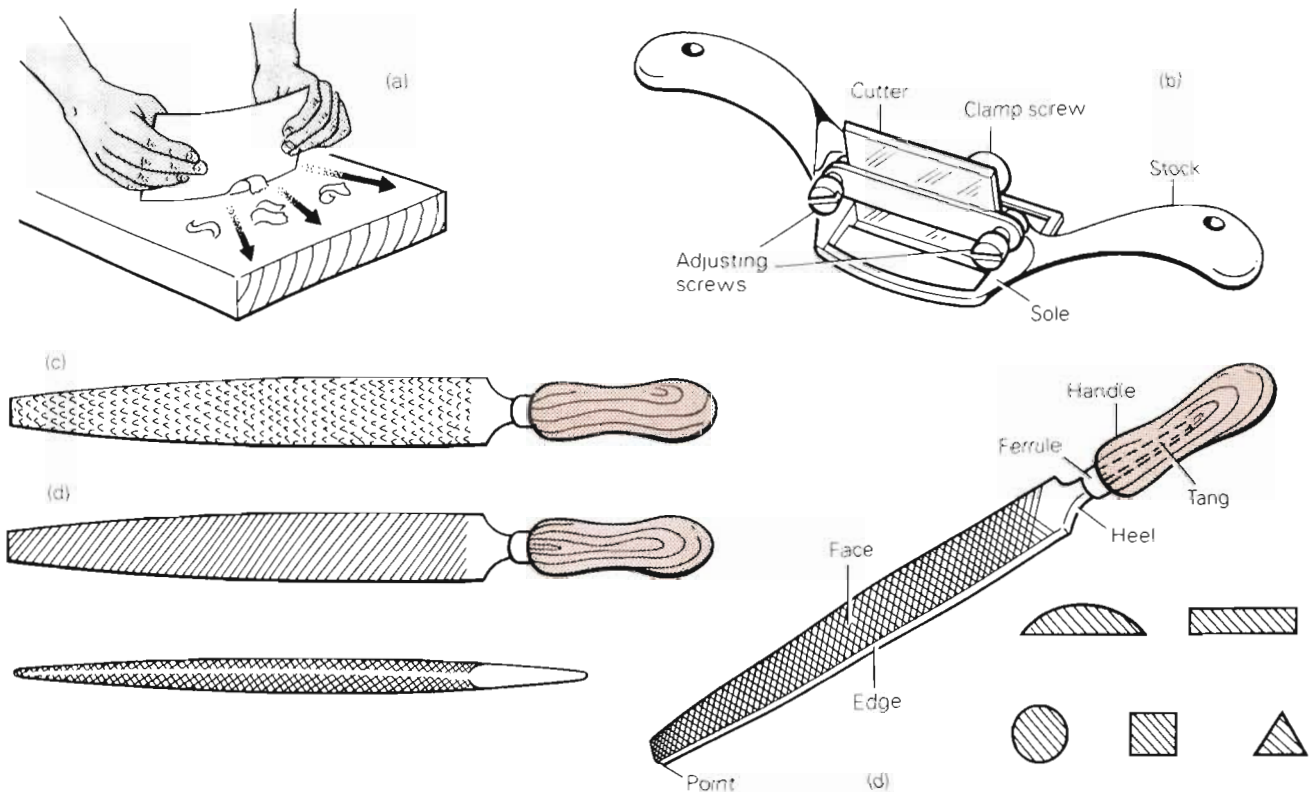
Abrading tools: (a) hand scraper, (b) cabinet scraper, (c) rasp, (d) files.
